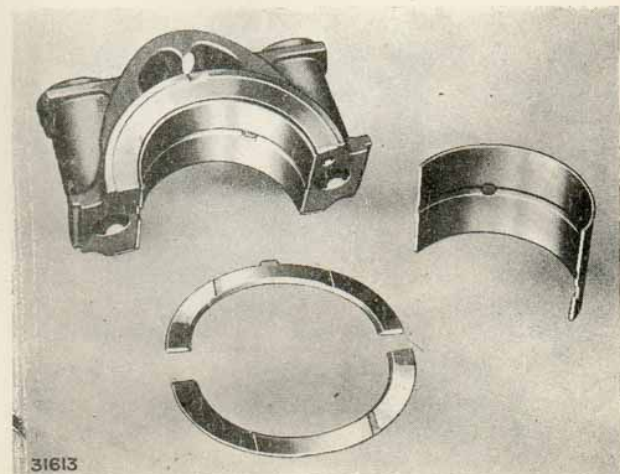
CENTRE MAIN BEARING AND THRUST WASHERS.
